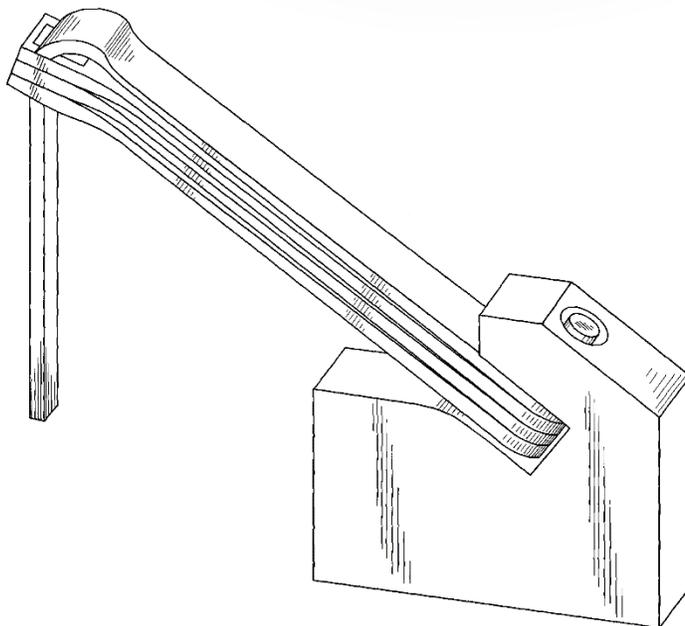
Standard holddown spring that can be improved with less parts, 3D printing, and CAD design.
